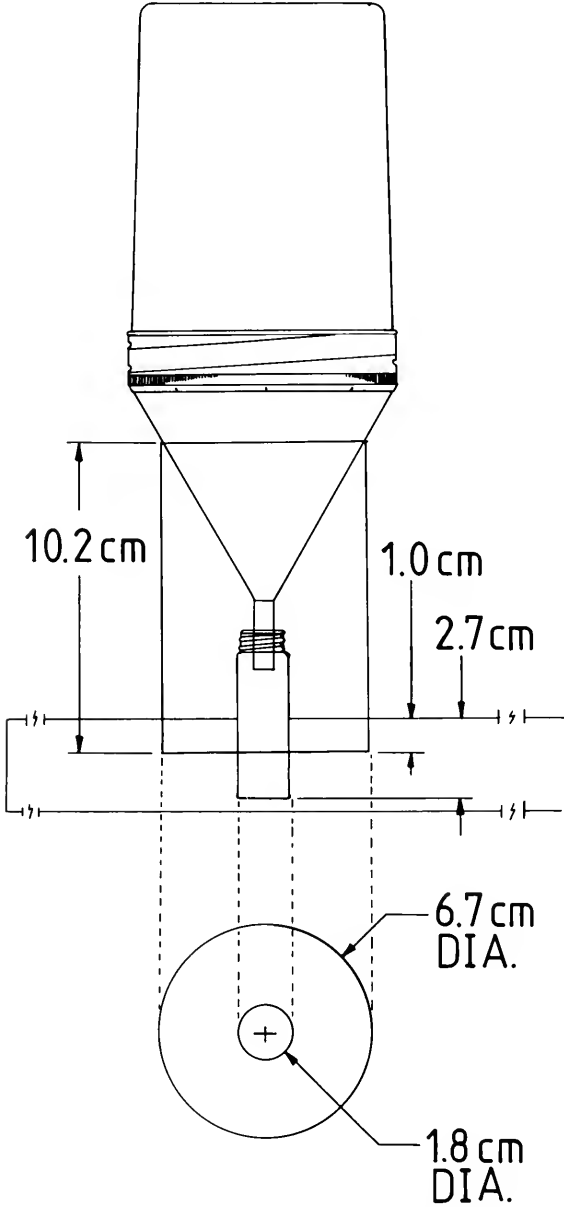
Dimensions of board designed to hold target vial and metal can.
